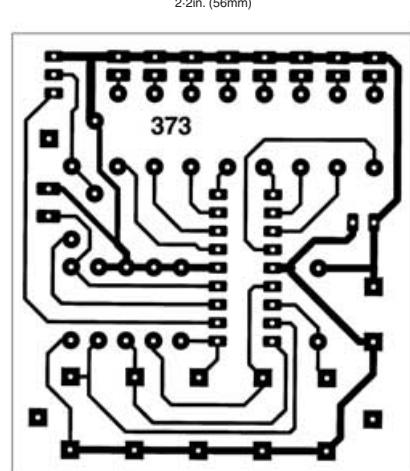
Chaser Controller printed circuit board component layout and wiring details. The multiboard full-size copper foil master pattern is shown below. (This board is available from the EPE PCB Service).
